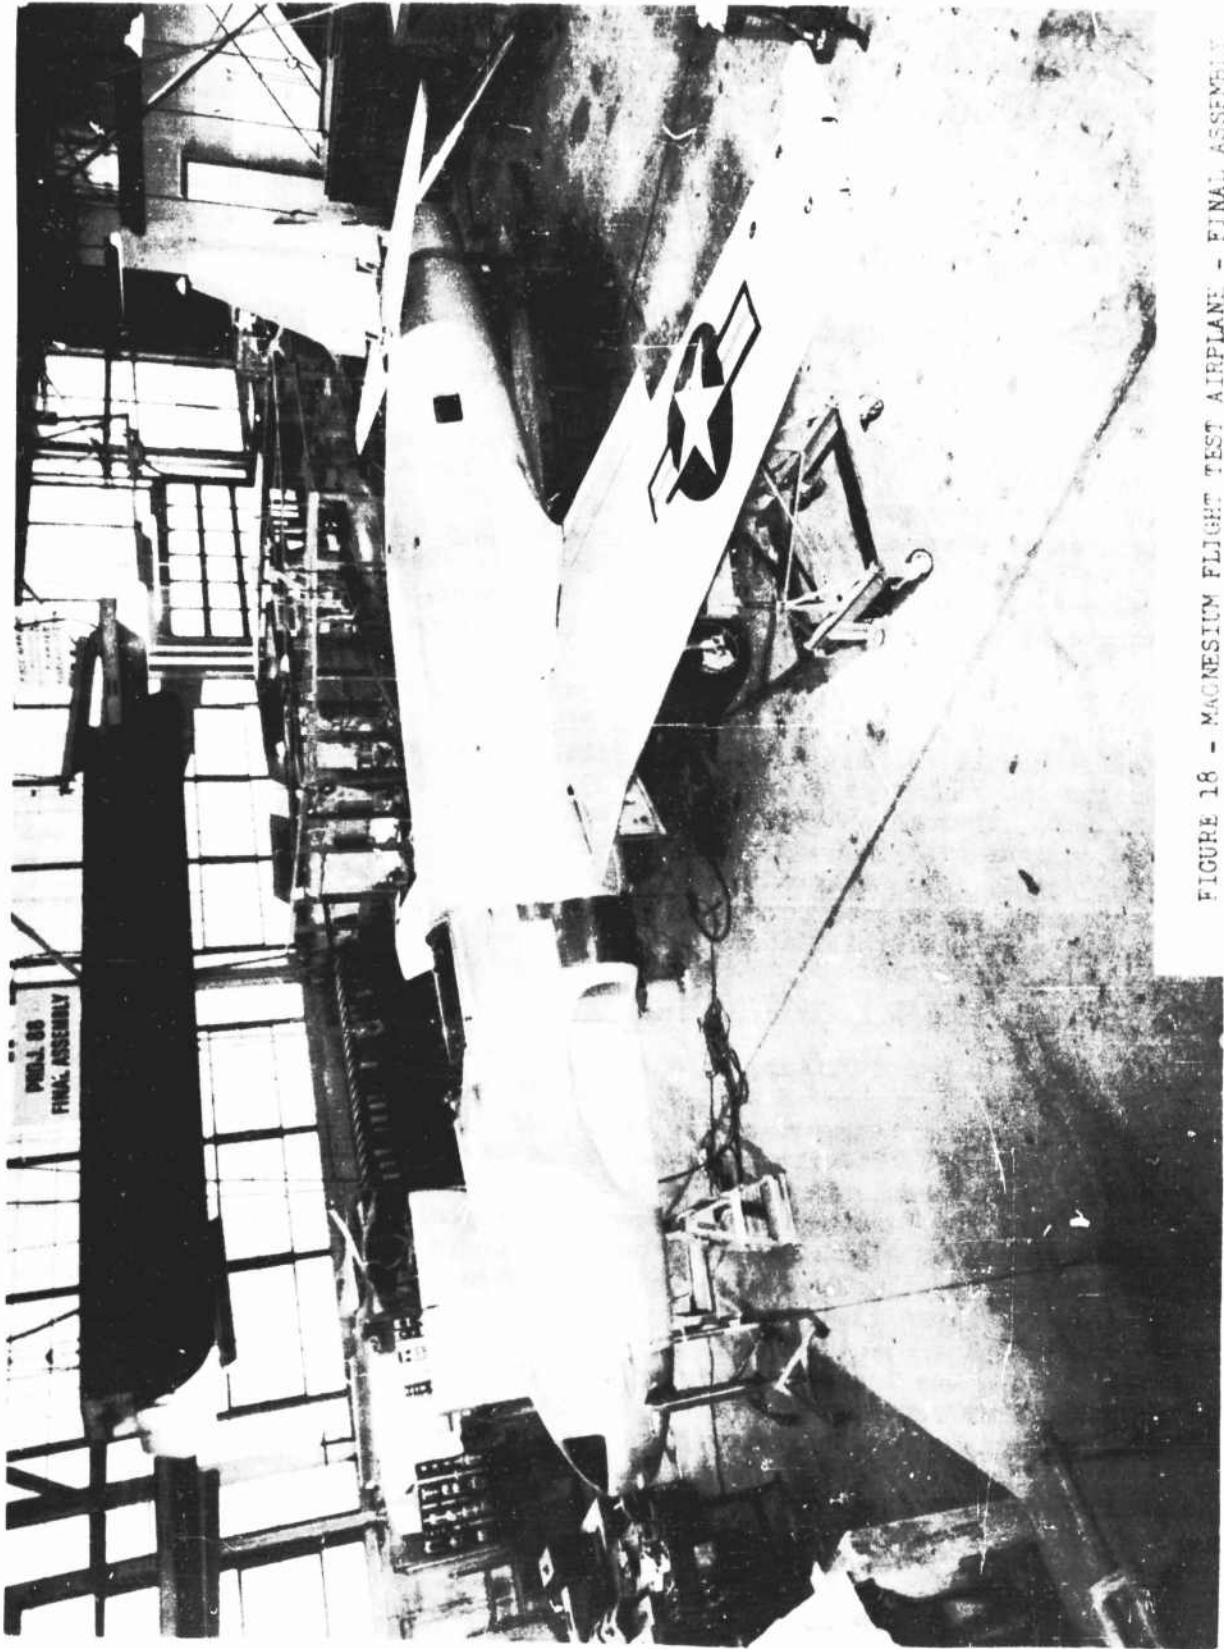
MAGNESIUM FLIGHT TEST AIRPLANE - FINAL ASSEMBLY
